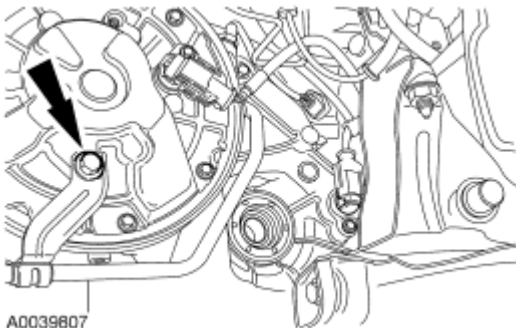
Locating Transmission Fluid Cooler Line Bracket & Bolt
